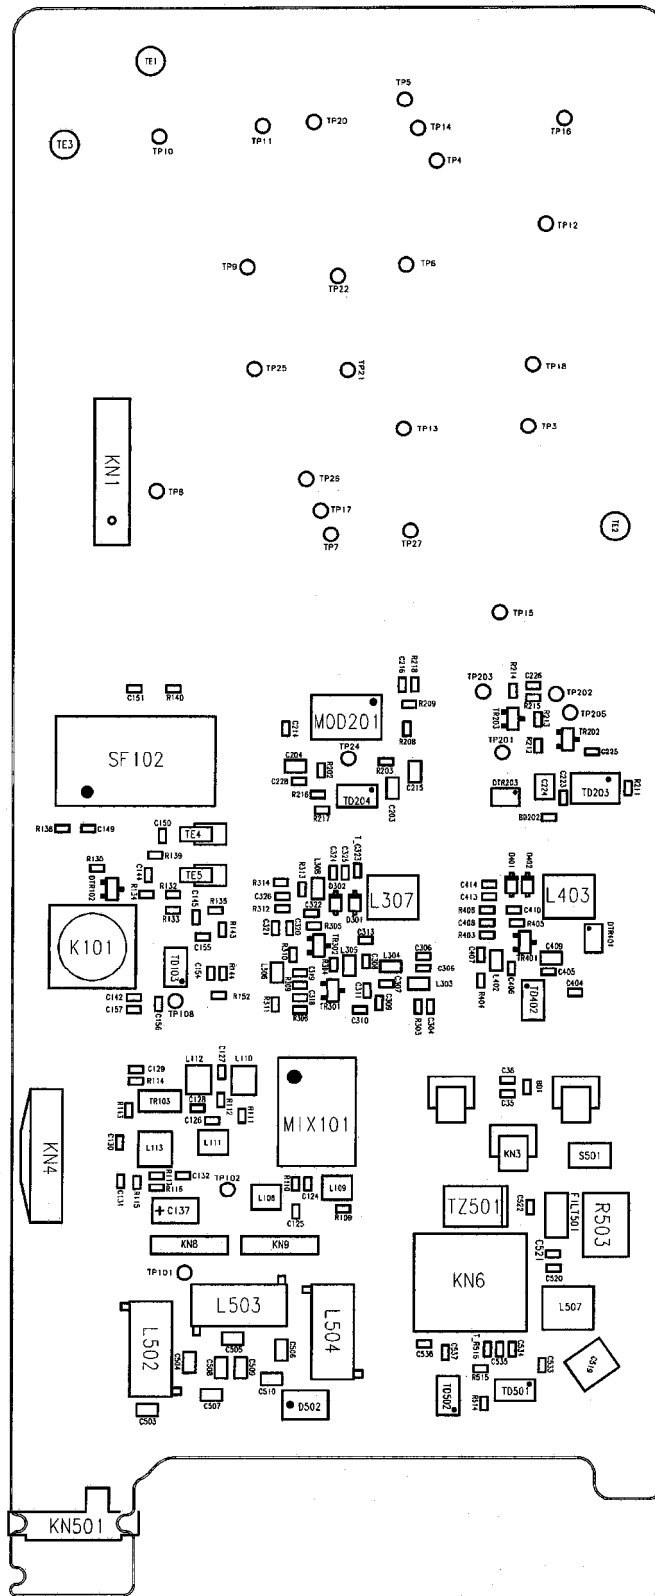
VHF RF and Control PCB Assembly Bottom Side
